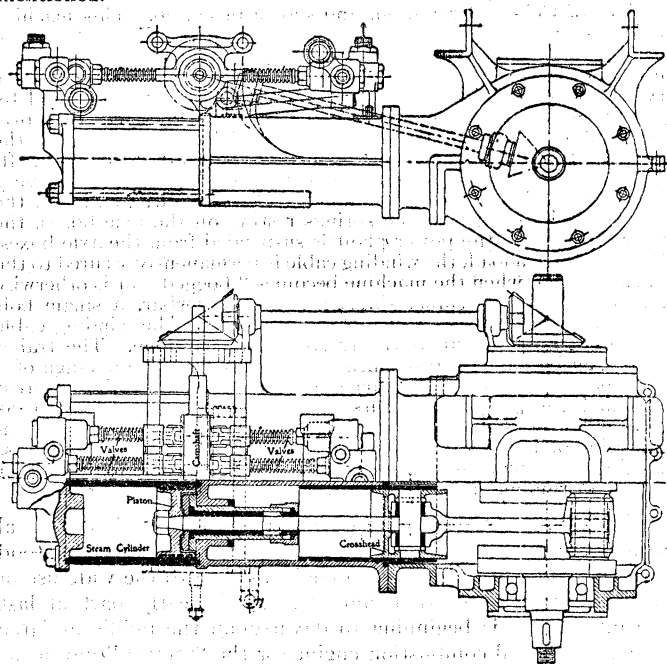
The Sheppee Motor Co.'s compact Double-acting Superheated "Steam-gas" Engine.
